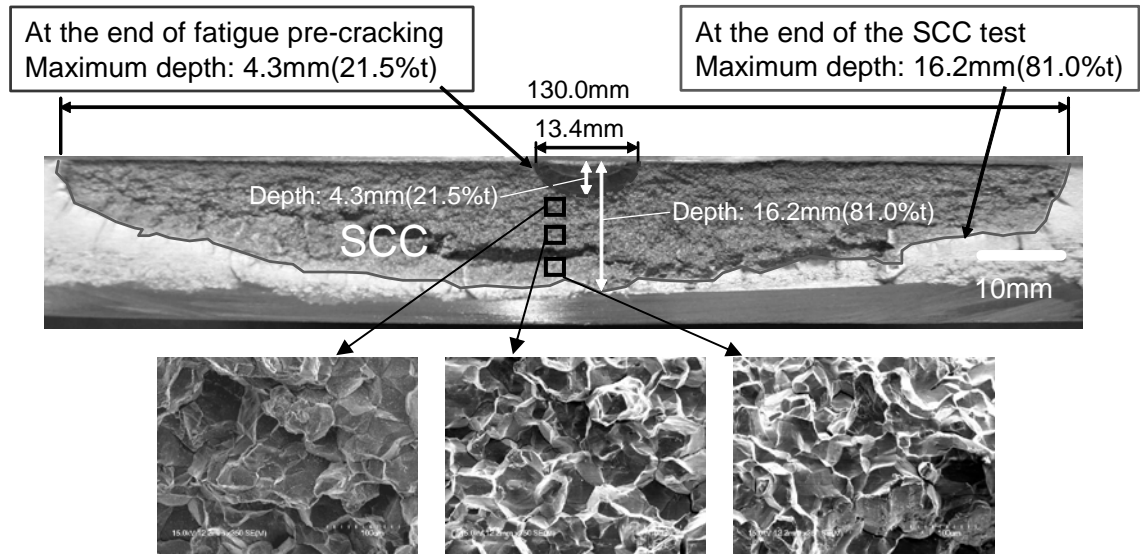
Fracture surface with typical IGSCC fractures for the specimen used in the measurements with the MICPD technique.
